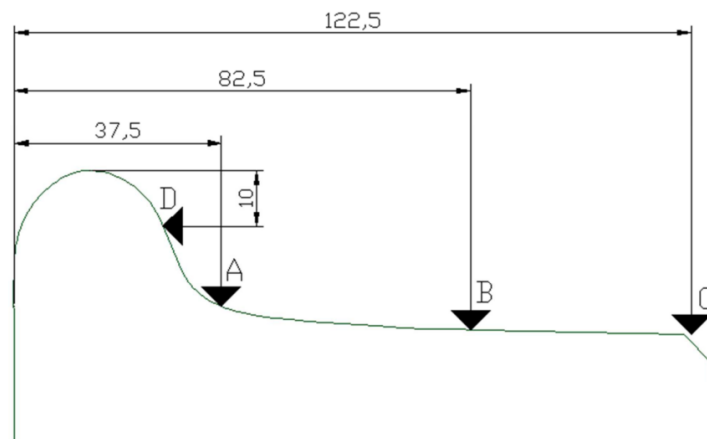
Contact locations. A: Flange root, B: Taping line, C: Field side, D: Flange lateral
